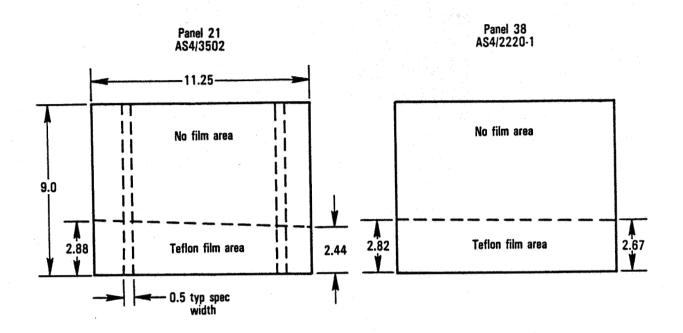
Teflon Film Misalignment in DCB Specimen Fabrication Panel
